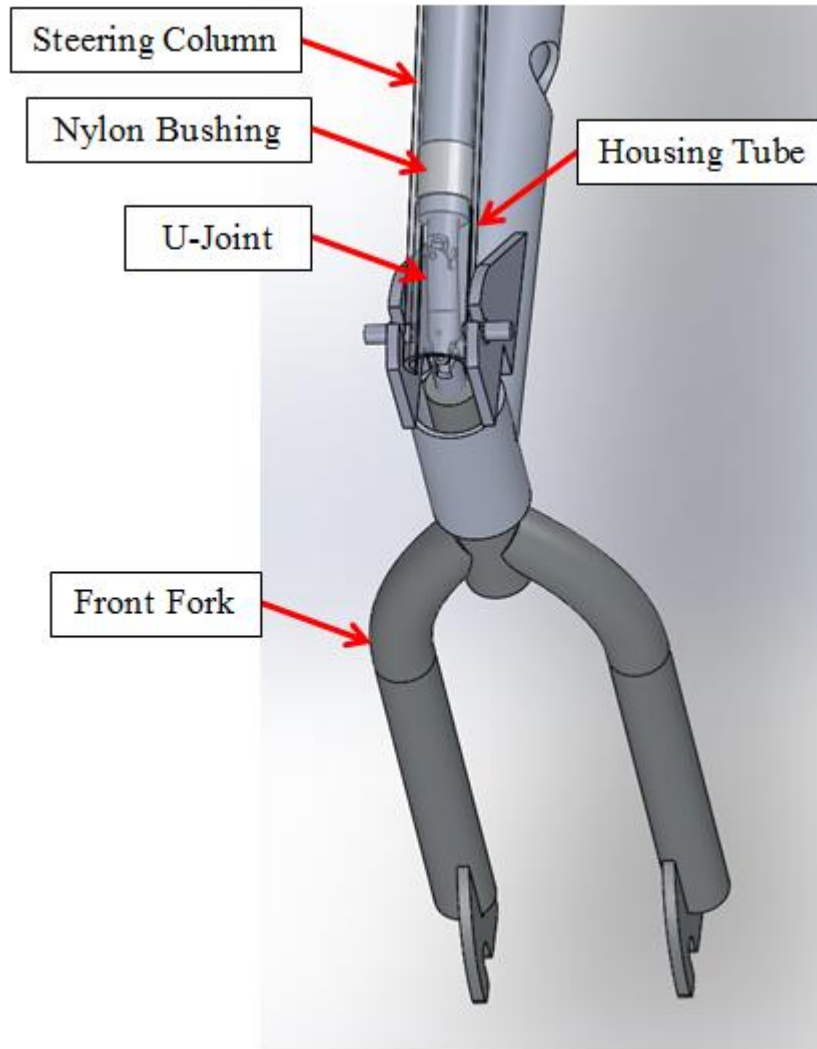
Steering Column with U-Joint Assembly. The U-joint connects the front fork to the steering column which is connected to the steering wheel (not shown).
